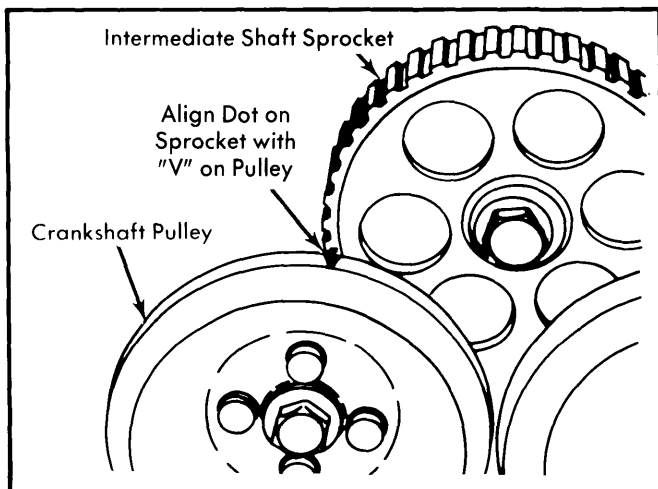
Intermediate Shaft Index Mark Aligned with Notch on Crankshaft Pulley
